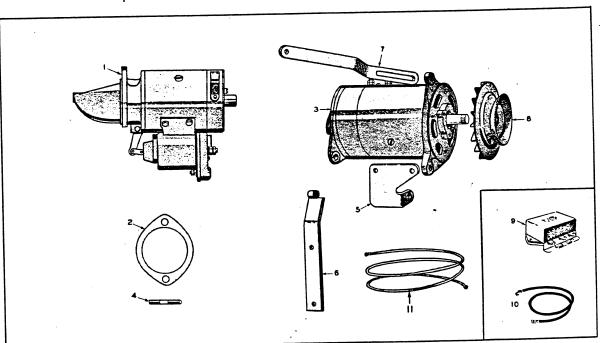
STARTING MOTOR & BATTERY CHARGING GENERATOR GROUP
